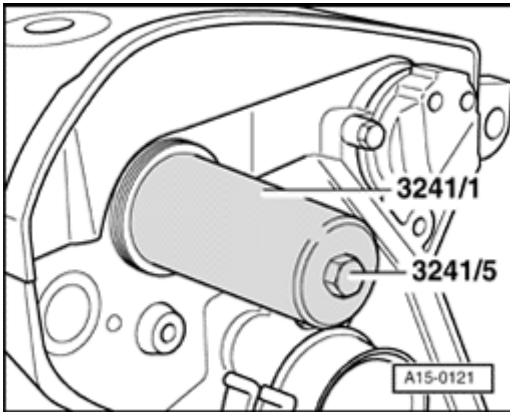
Pressing Oil Seal In Onto Stop With Press Sleeve 3241/1
